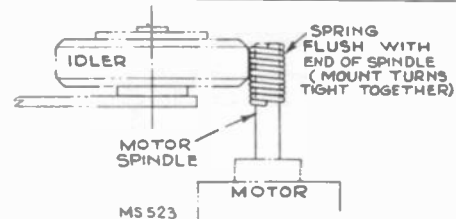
Spring Sleeve Installed on 60-Cycle Motor Spindle for Operation on 50-Cycle Supply.
